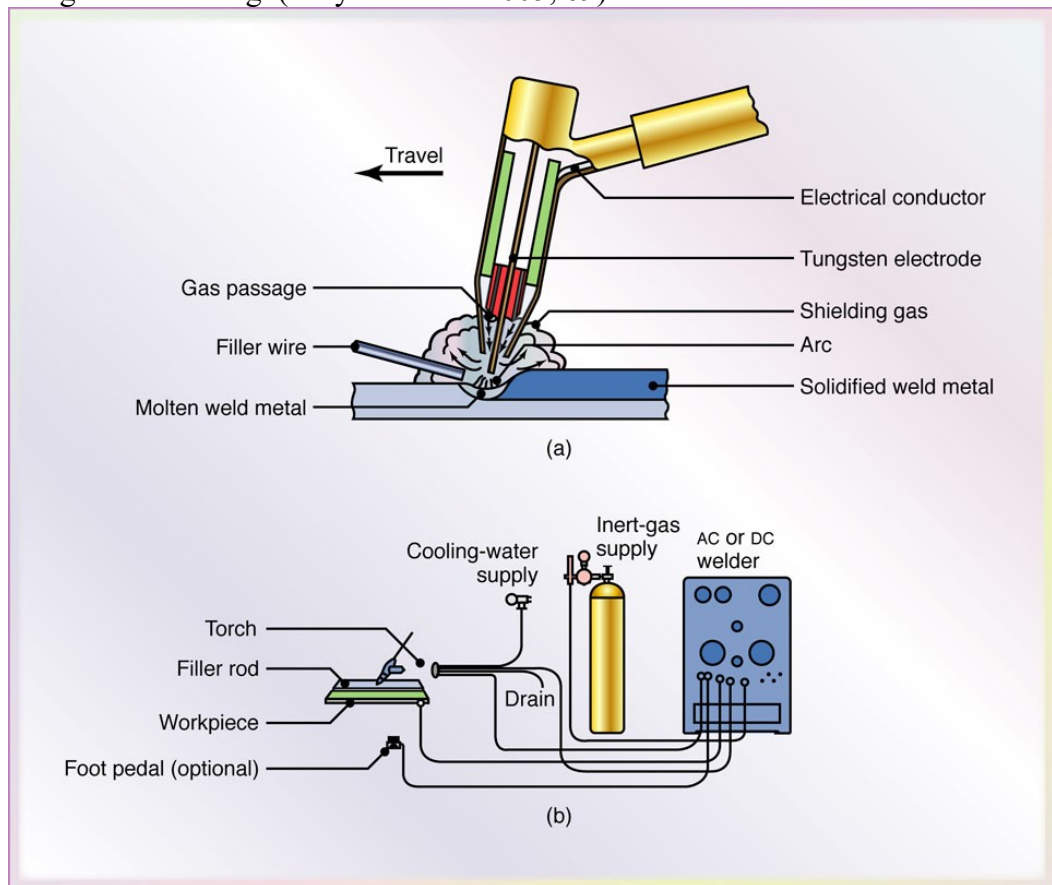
(a) The gas tungsten-arc welding process, formerly known as TIG (for tungsten inert gas) welding. (b) Equipment for gas tungsten-arc welding operations. (Väisänen2013.)
